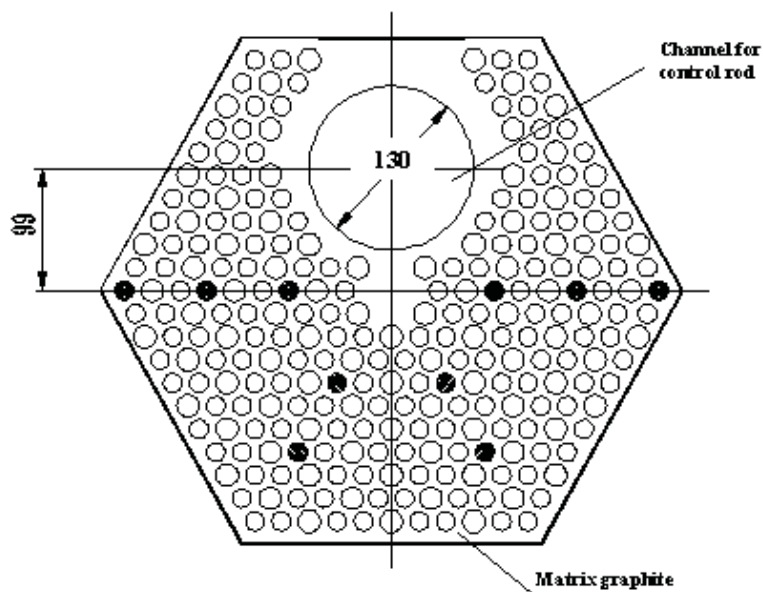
Fuel block with cavity for control rod or reserve shutdown system, type 2 fuel assembly.
